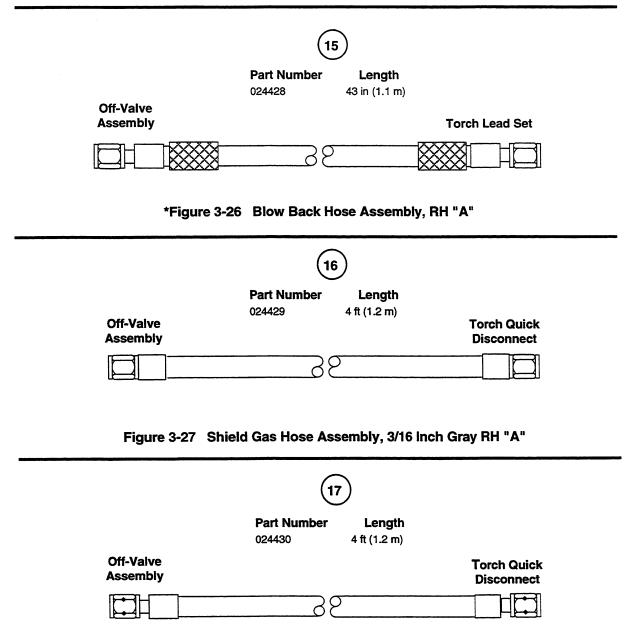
Plasma Gas Hose Assembly, LH "A"
